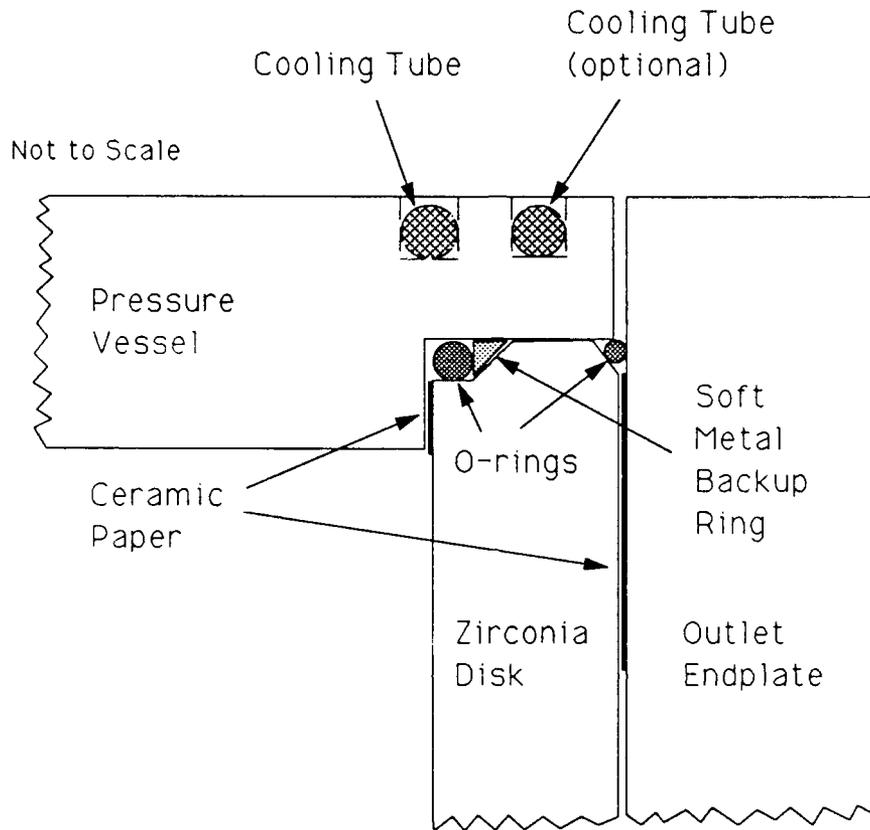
Advanced Zirconia-Metal Joint, Design B. Attachment of Endplate to Pressure Vessel not shown. The Backup Ring is typically made of copper, and is used to prevent extrusion of the O-ring.
